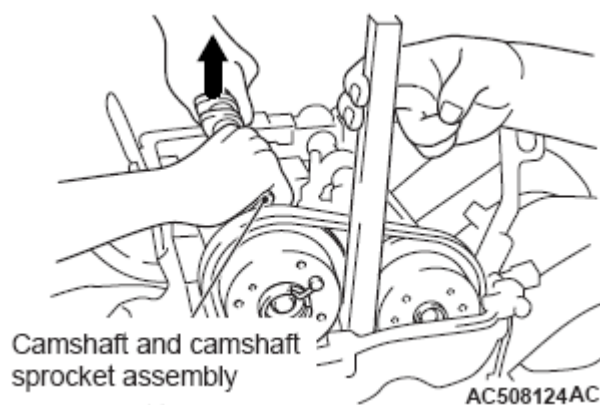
Removing Camshaft And Camshaft Sprocket Assembly
